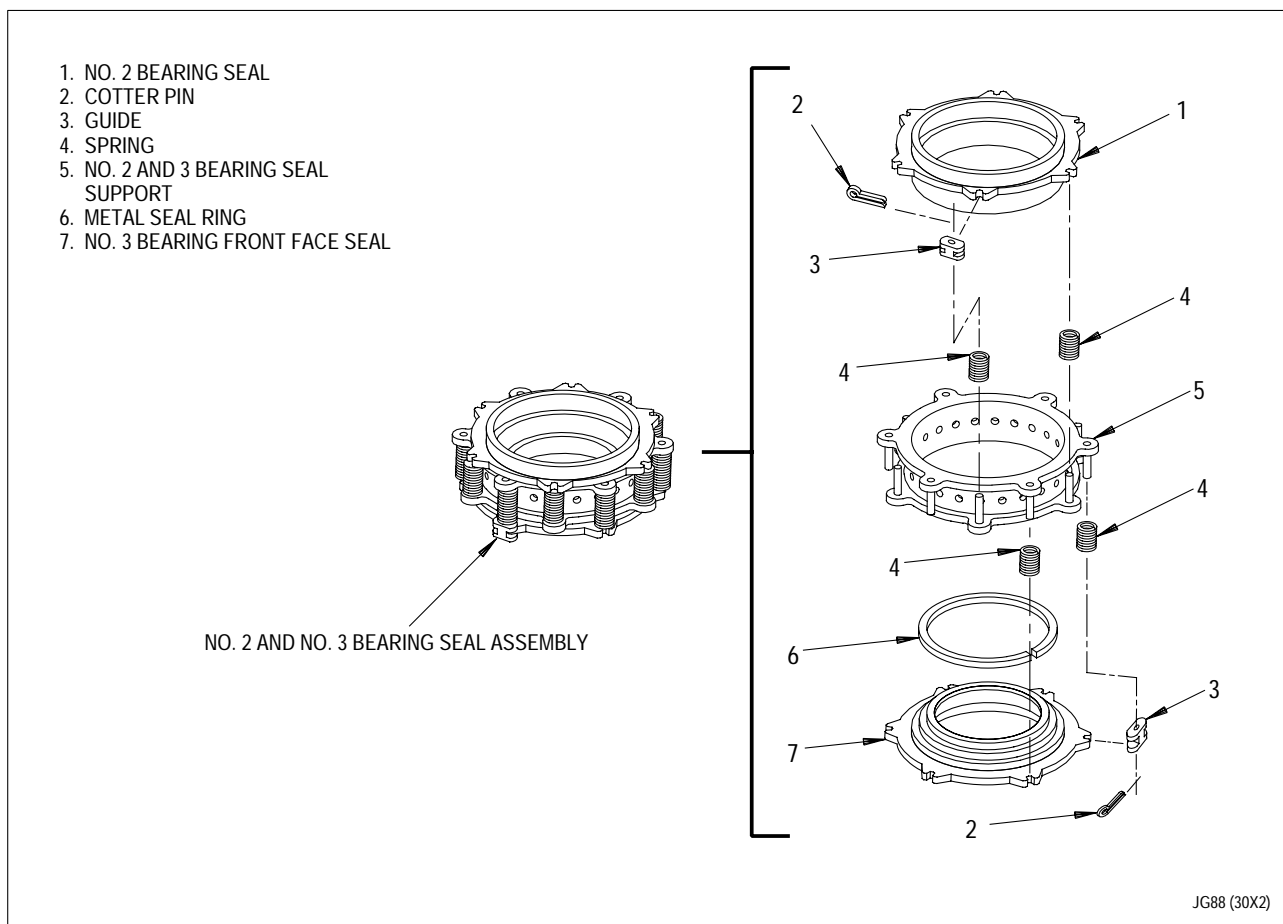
No. 2 and 3 Bearing Seal Assembly - Disassembly
